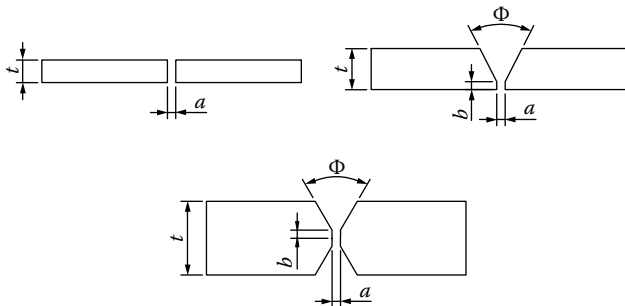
Joint design for austenitic SS welding.
